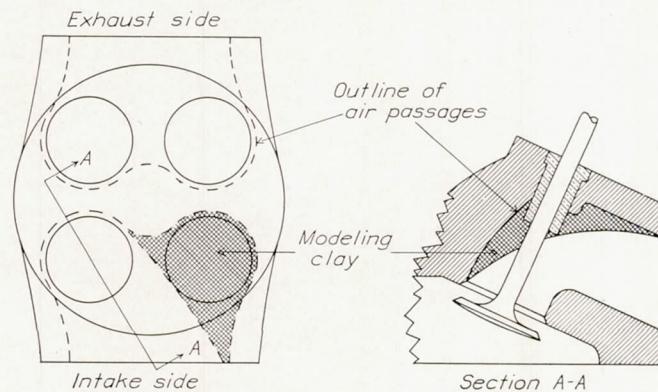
Sketch showing parts of intake-air passage in cylinder head filled with modeling clay.
